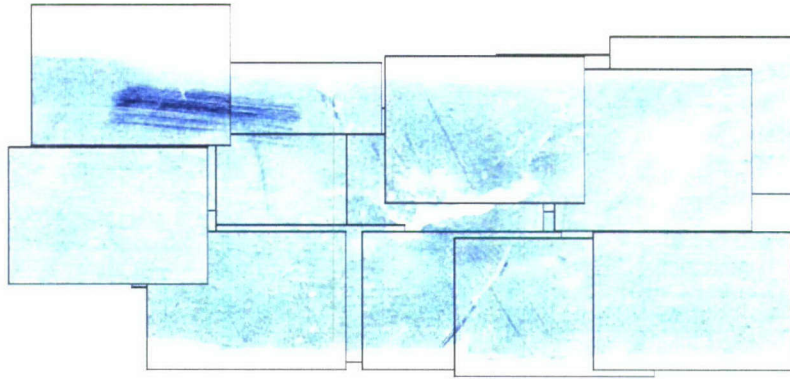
EAFSW weld cross-section of Al 5083 plate with similar weld parameters to those of Figure 10. Tip geometry was a truncated cone with sloping shoulder. Scale: ~10X
